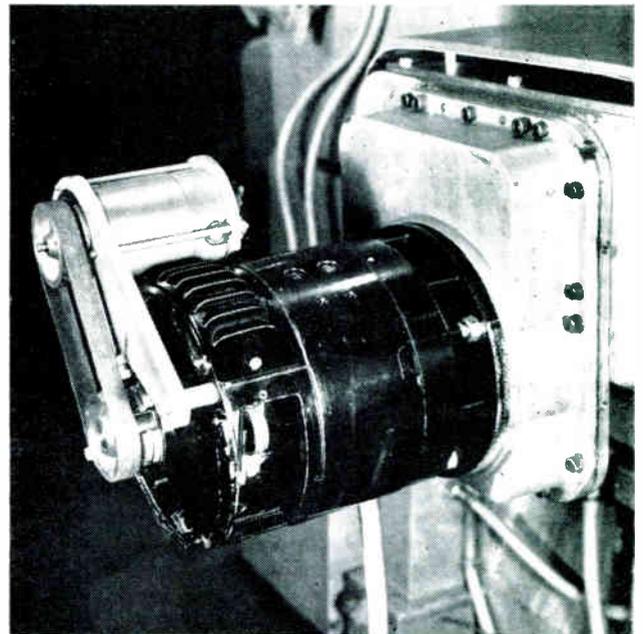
Table drive gearbox for magnetic tape-controlled Newall 1520 c.c. jig borer
